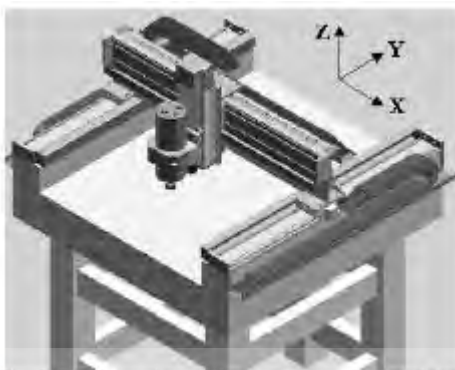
Configuration of linear servomotor driven machine tool [13]
